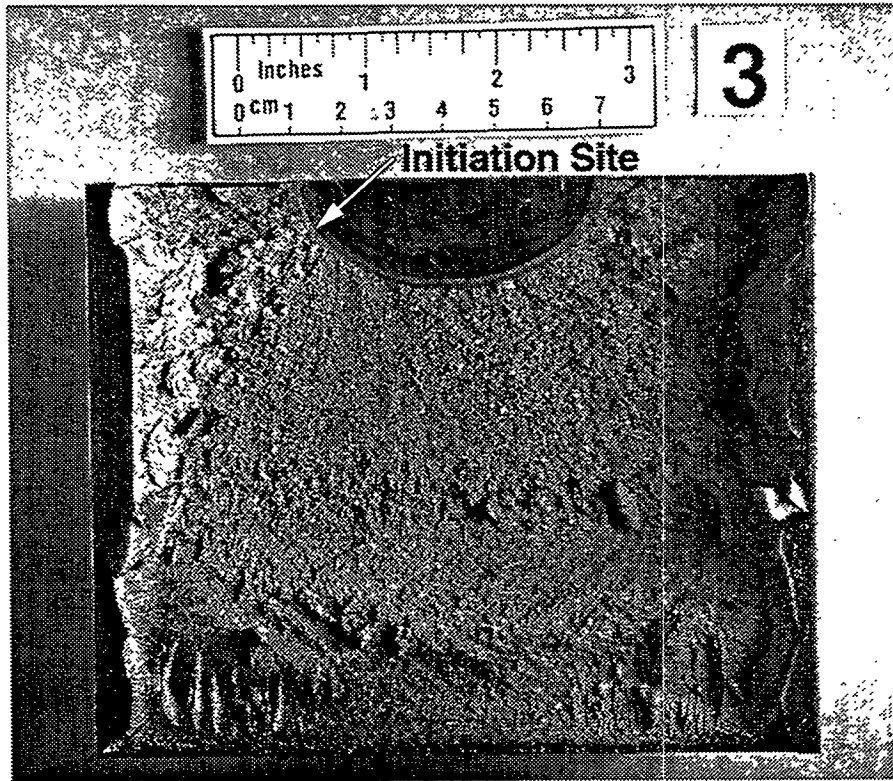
Fracture surface for finite-length flaw specimen CF-3 showing location of cleavage initiation site
